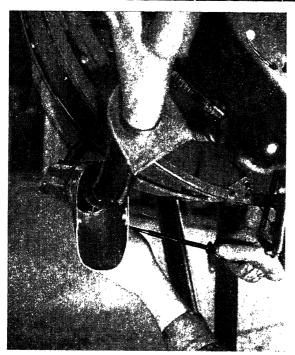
(left).—RE-MOVE HEATER MUFFS ON EXHAUST PIPES AND INSPECT PIPES.
